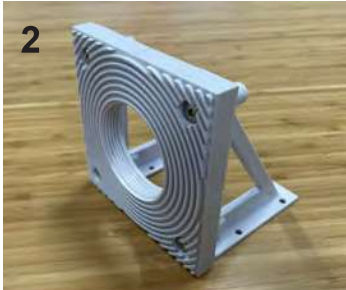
Attach the two included mounting brackets to the platform using the included mounting bracket screws (4).
